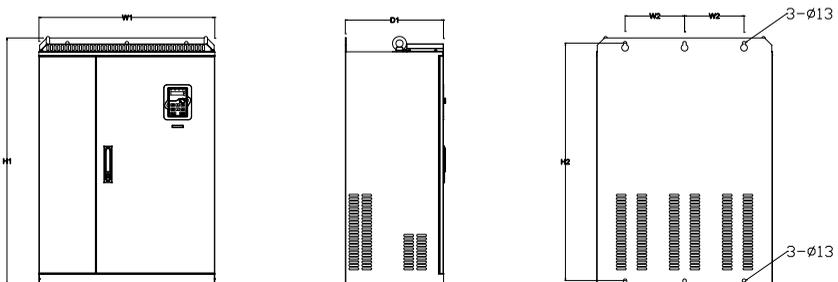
Wall-mounting diagram of servo drives of 380 V, 220 to 315 kW
